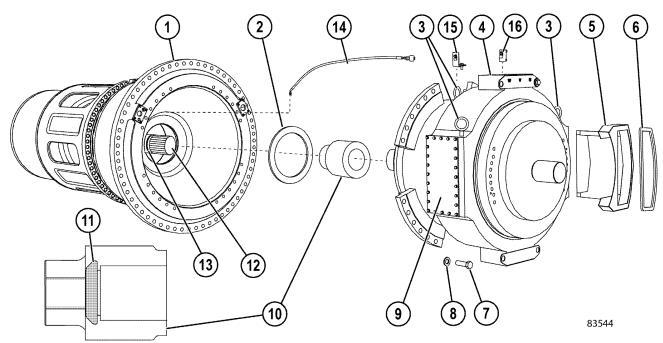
WHEEL MOTOR ASSEMBLY
